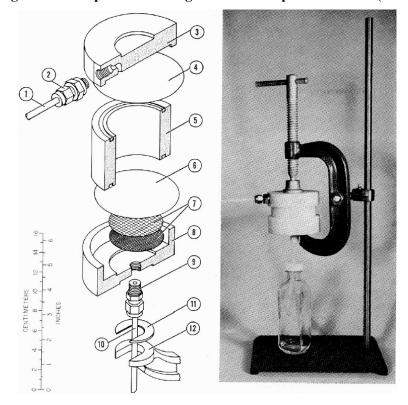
Exploded isometric drawing of squeezer and a photograph: 1) nylon gas inlet tube,
